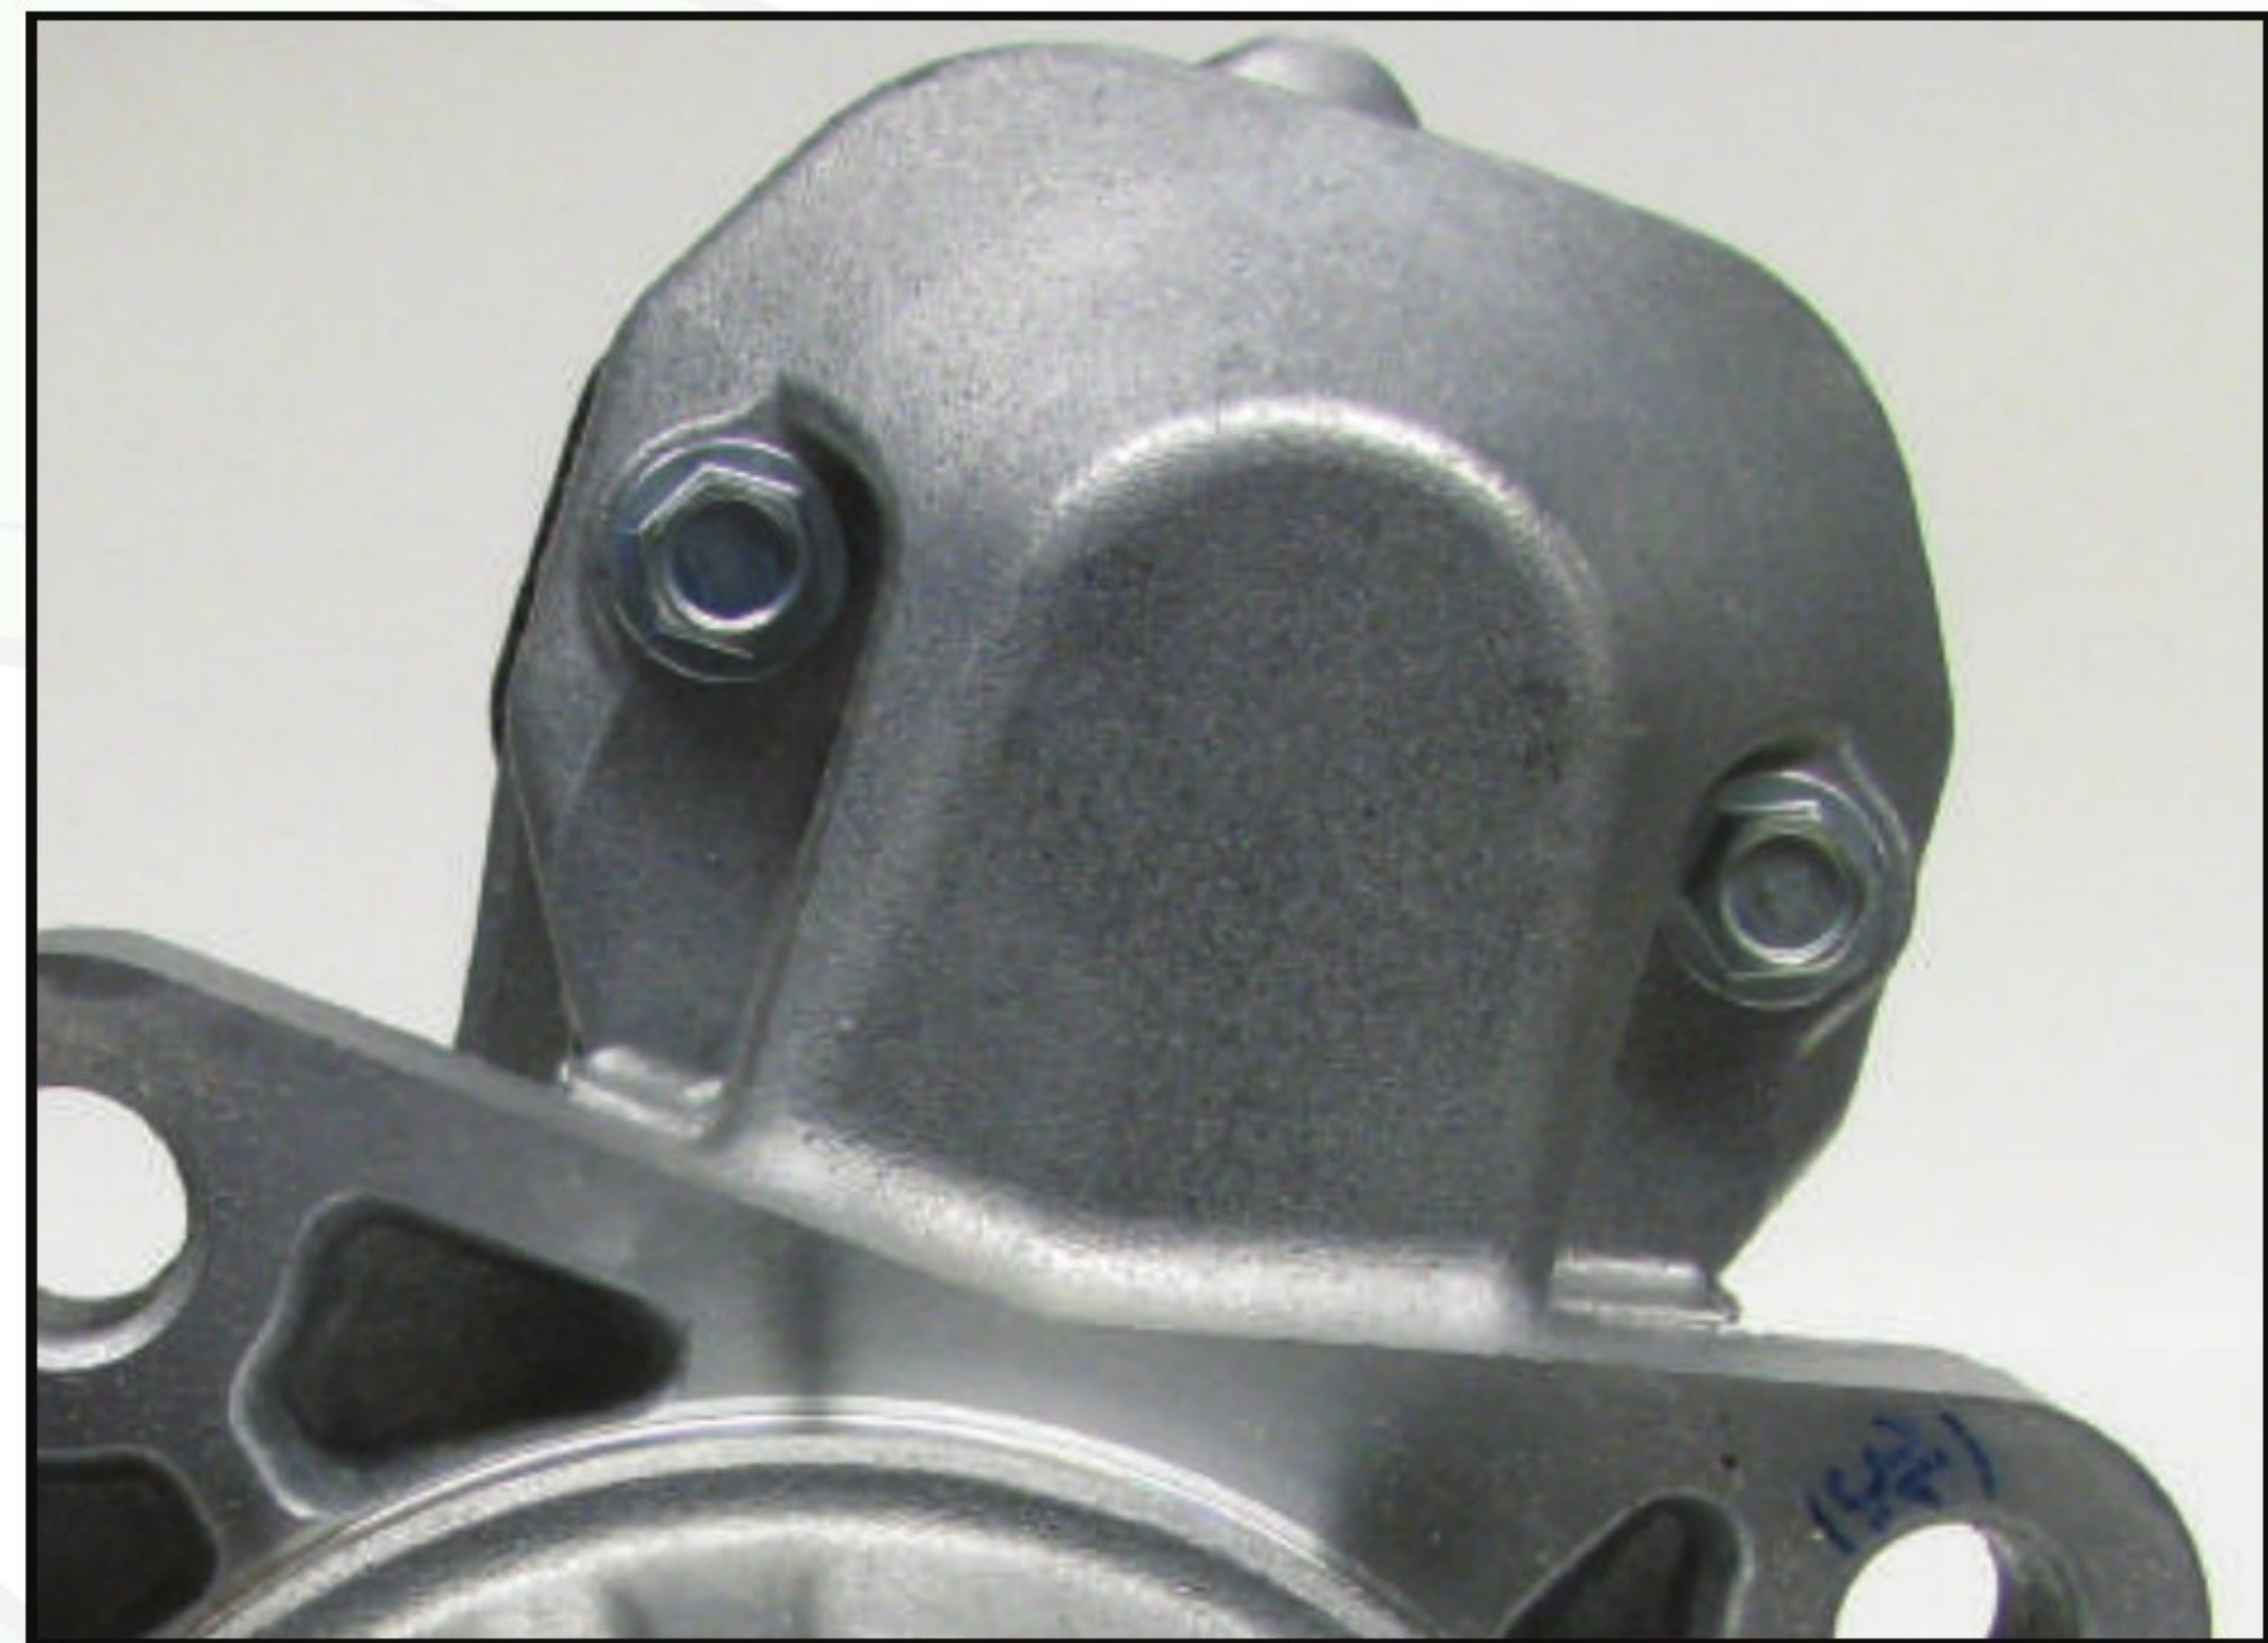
Remove these two solenoid bolts before attempting to separate the DE housing from the solenoid housing.
